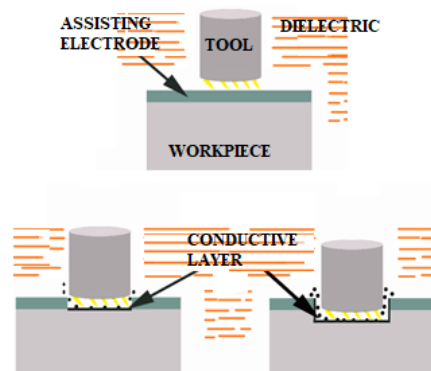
Assisted Electrode Electrical Discharge Machining (AEEDM)
